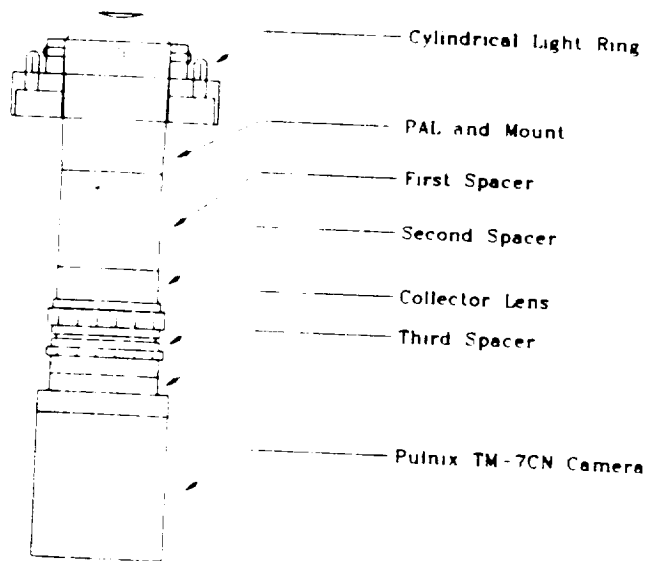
Cylindrical Light Ring (CLR) assembly.
